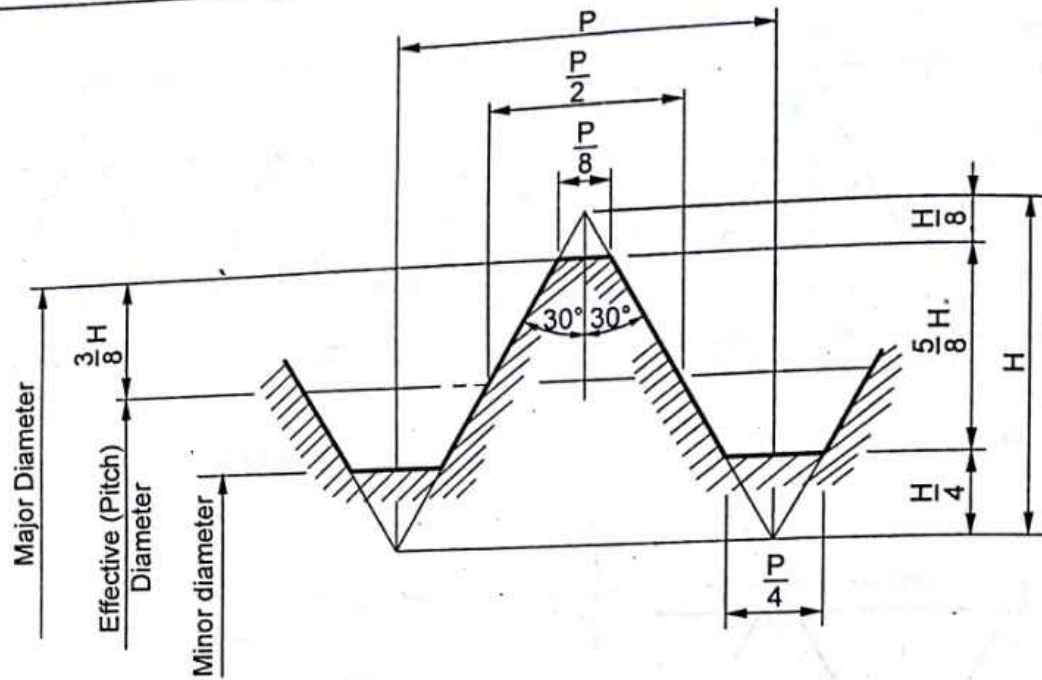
(d-1) Basic profile of the ISO metric screw thread
